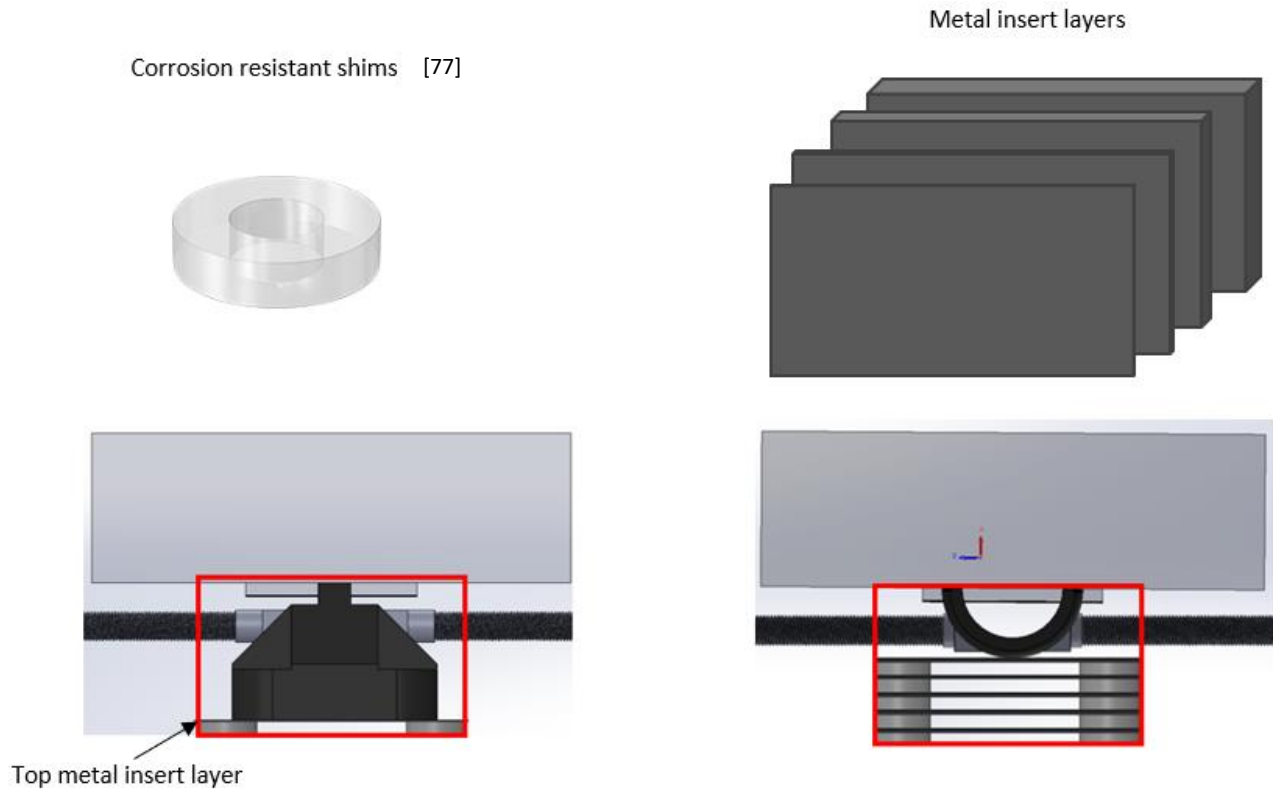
CAD assemblies with an example parts held by lid, inserts, shims, and clamping supports.
